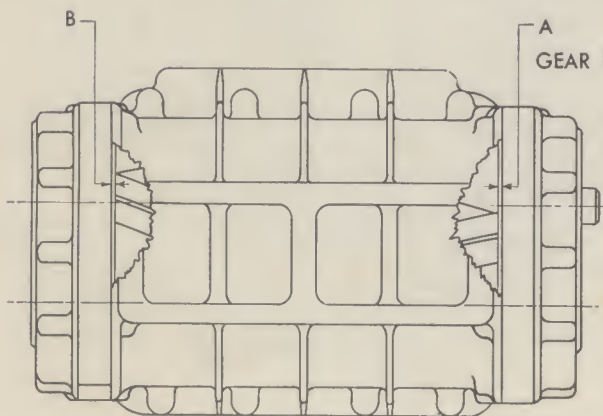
B—Method of checking rotor clearance with feeler gage ribbons. Measurements should be made both from inlet and outlet sides of blower.
